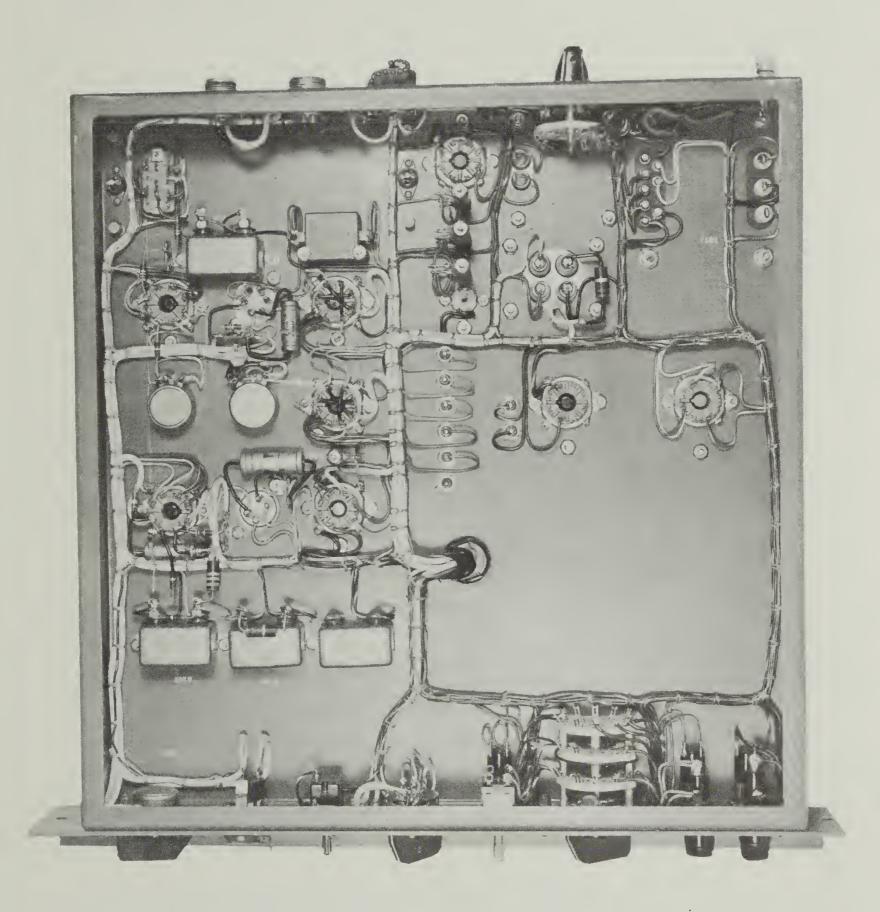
ELECTRONIC UNIT BOTTOM VIEW
